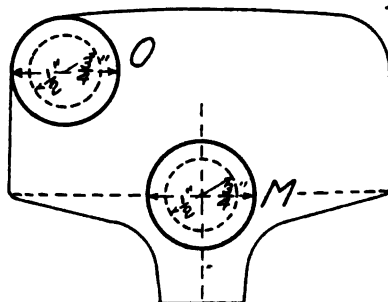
LOCATIONS OF SPECIMENS FOR TENSILE TESTS.
